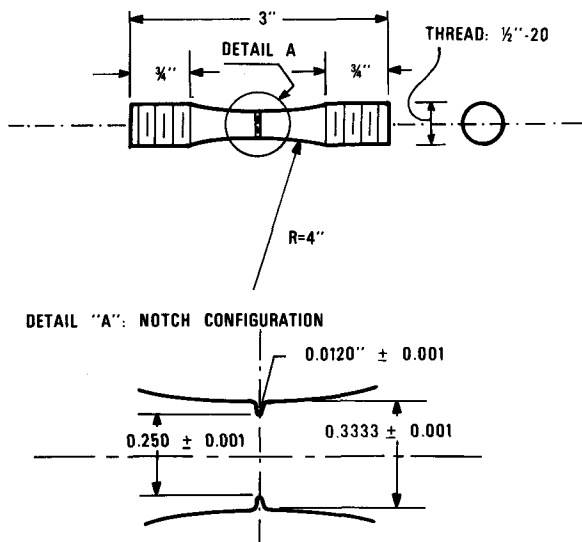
Notched fatigue specimen geometry. Machining dimensions are in inches.
